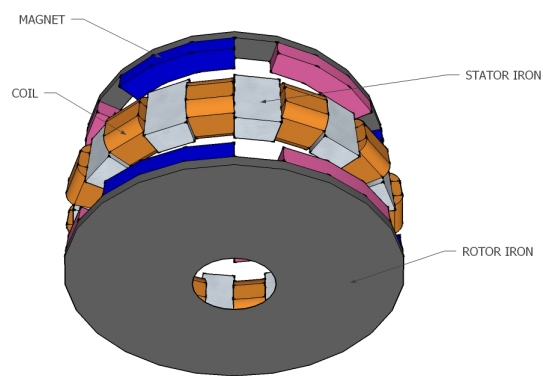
AFPM machine with 2 external rotors and ring-type windings
